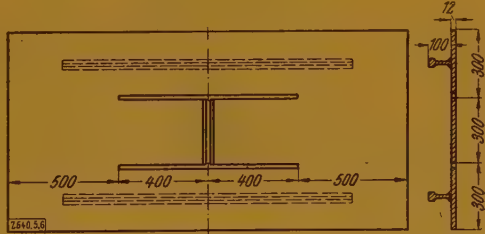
No. 1 type test piece. The plates to be welded have been machined out (by milling) of a large plate.
